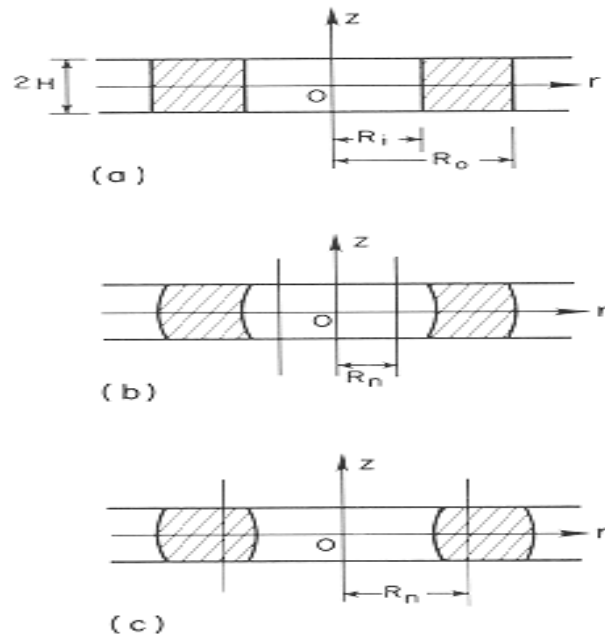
(a) specimen before ring test, (b) Specimen after ring test with lubrication, (c) Specimen after ring test without lubrication [20]
